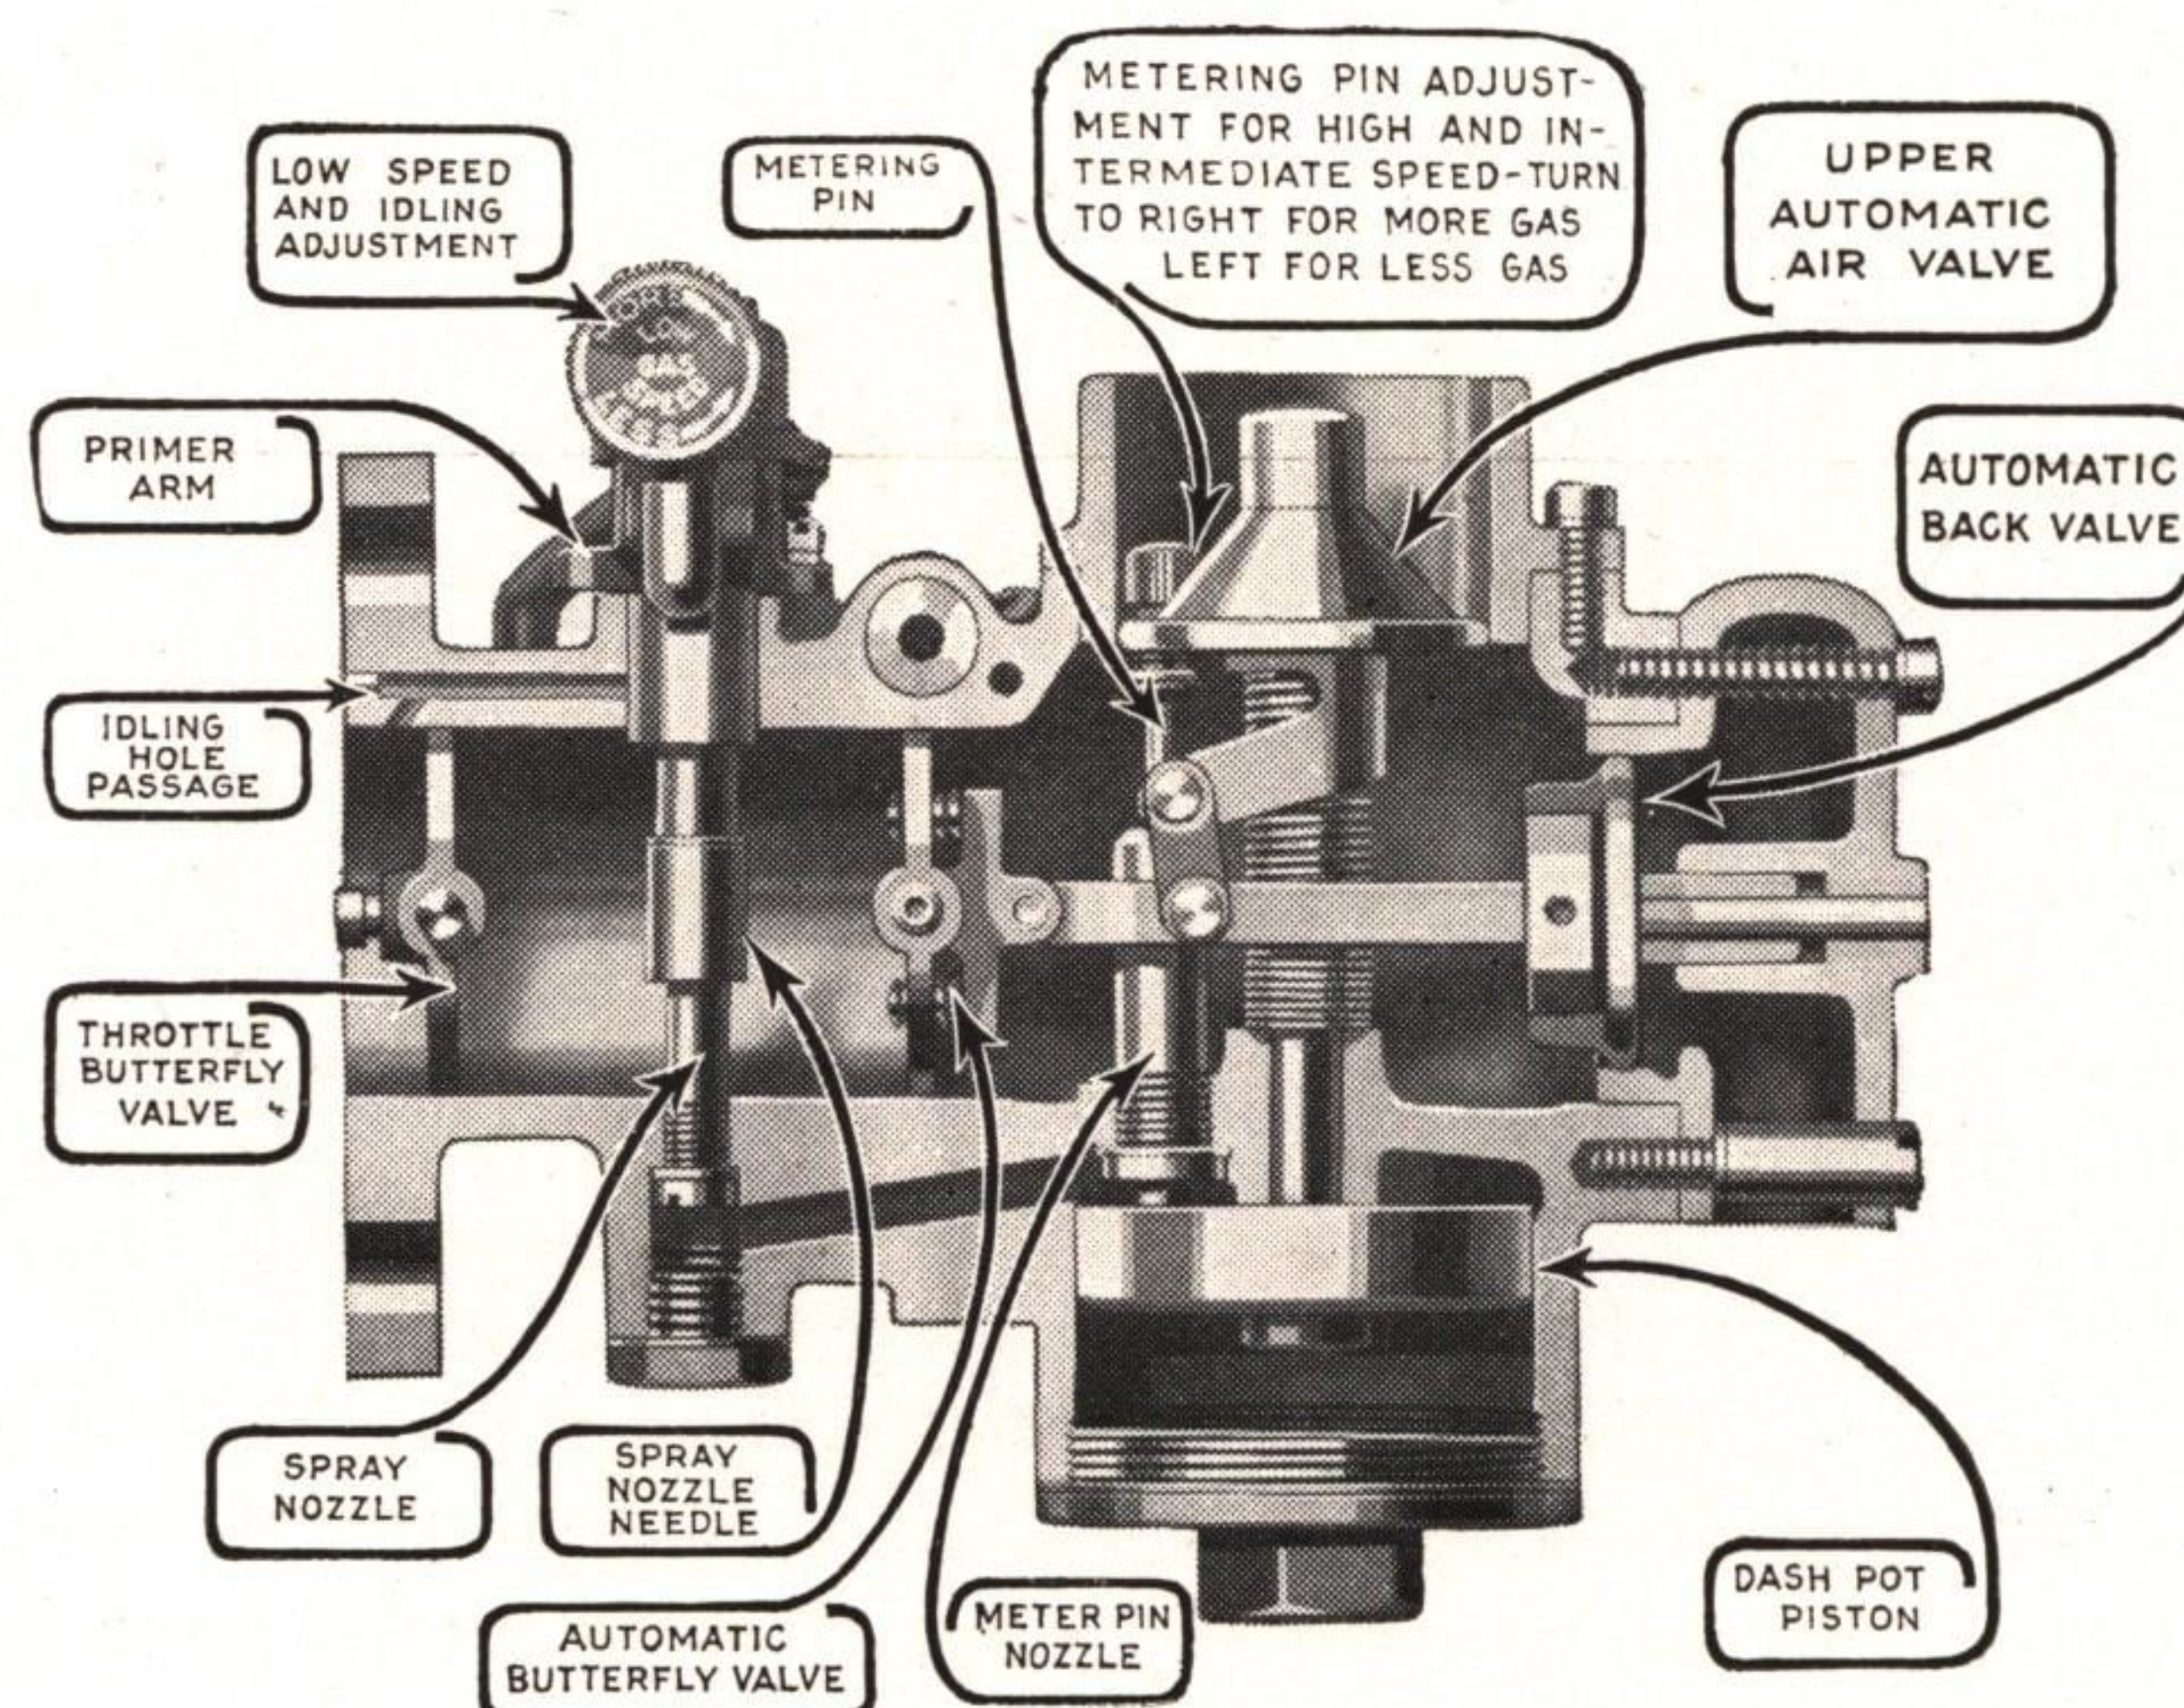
Section thru Carburetor with Parts Named and Indicated
